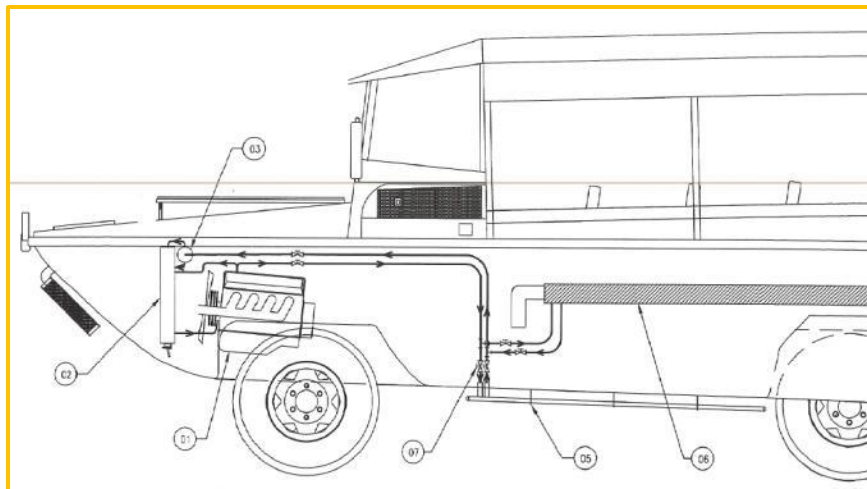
Stretch Duck cooling system schematic - profile view. Item descriptions: 01-Engine, 02-radiator, 03-surge tank, 04-overflow tank, 05-keel cooler, 06-heater, 07-ball valve. Drawing by RTDI.
